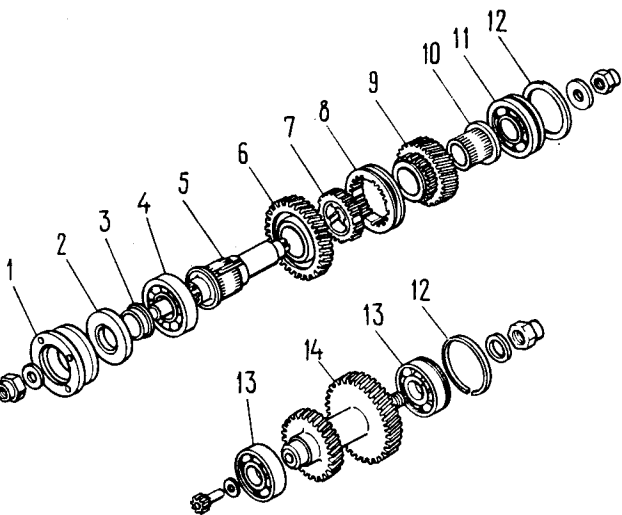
Parts of Drive Shaft and Countershaft:
